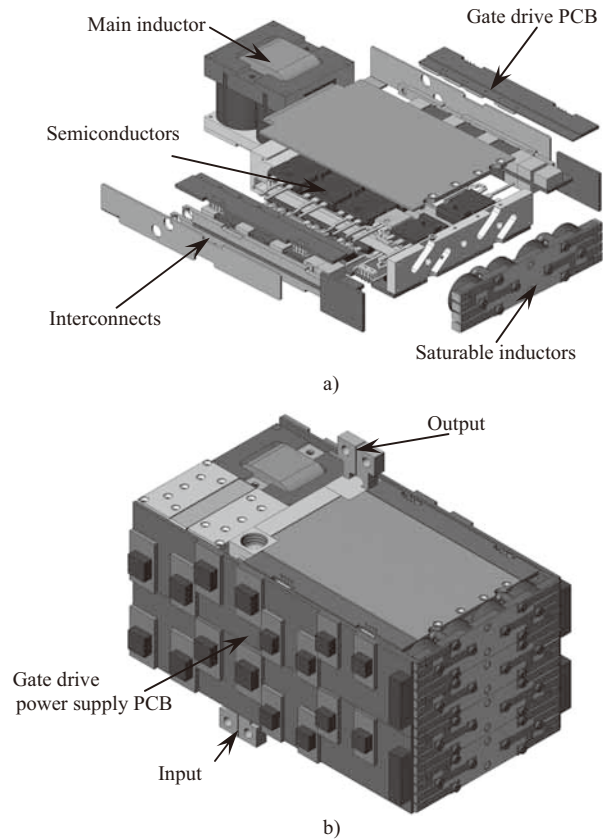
3D model of converter prototype; a) single phase exploded view, b) complete converter structure
